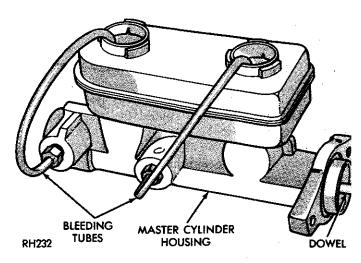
Master Cylinder Bleeding—Two-Section Cylinder Shown
